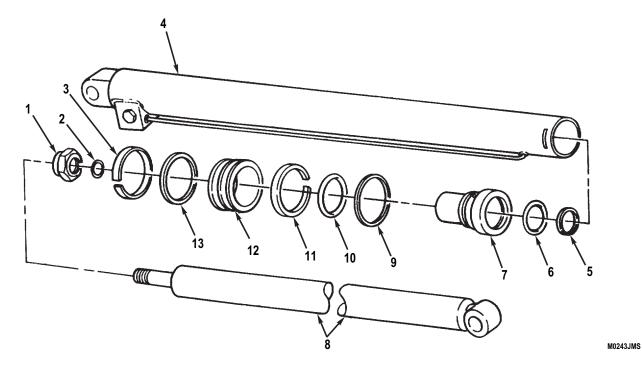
Hydraulic Lift Cylinder (without Side Lift Kit) Assembly.
